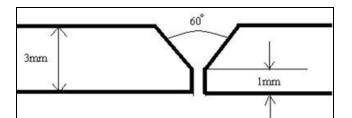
Edge Preparation of Weld Specimens [3].
